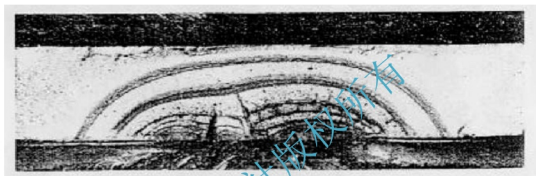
Fracture surface of a fatigue failure
